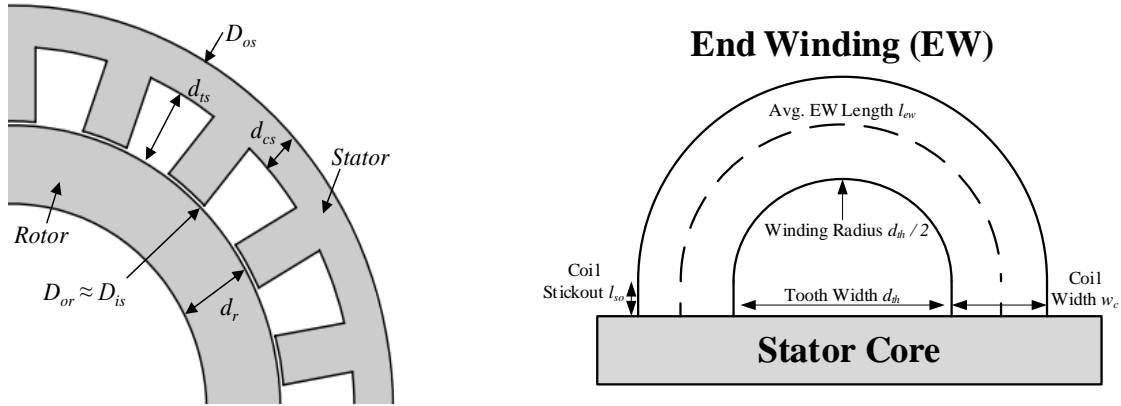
Sizing equation stator and rotor cross-section and end-winding dimensions.
